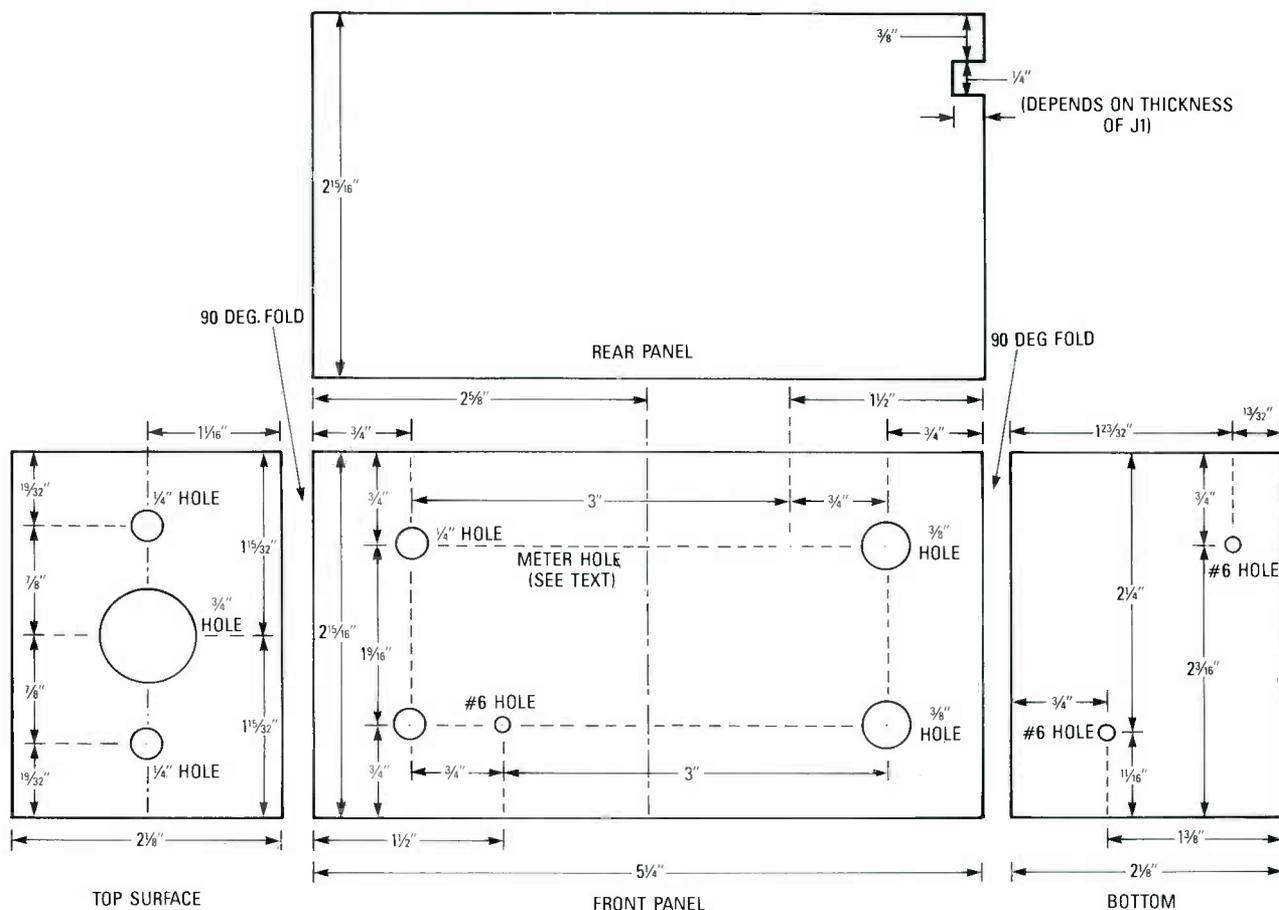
ION METER CASE LAYOUT, consisting of top surface, front panel, bottom surface, and rear panel. Make sure that everything has been carefully measured before any drilling or cutting.
